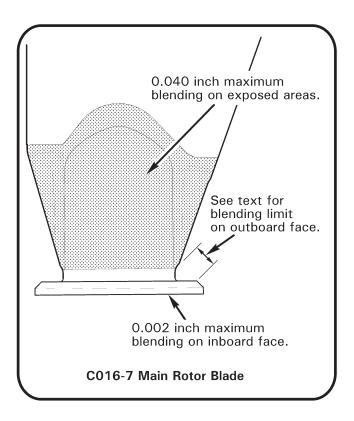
ROOT FITTING BLEND LIMITS
